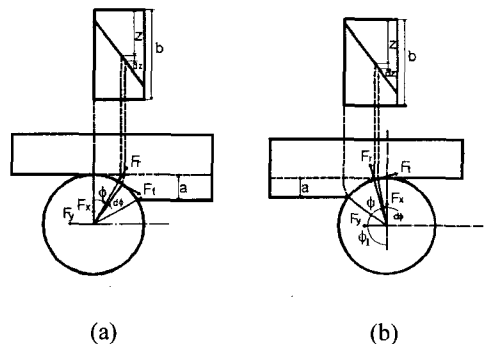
The cutting force component (a)Up endmilling, (b)Down endmilling
